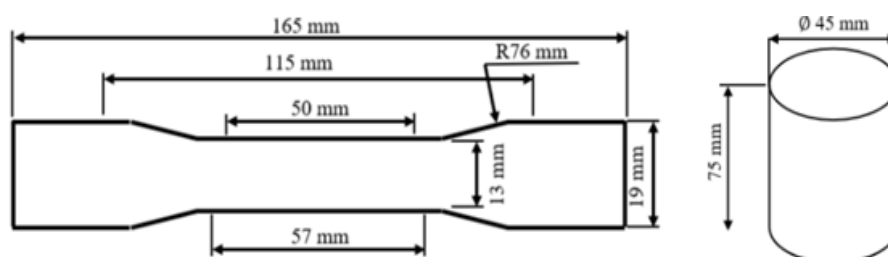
Dimensions of the tensile (thickness = 3.2 mm, left) and compressive (right) composite test specimens according to ASTM D638 and ASTM D1021, respectively.
